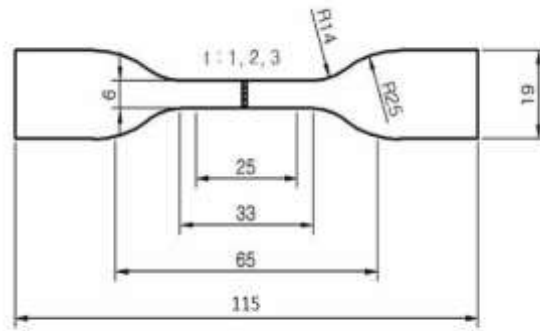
ASTM D638 - Type IV Tensile Specimen (Dimensions in mm)
